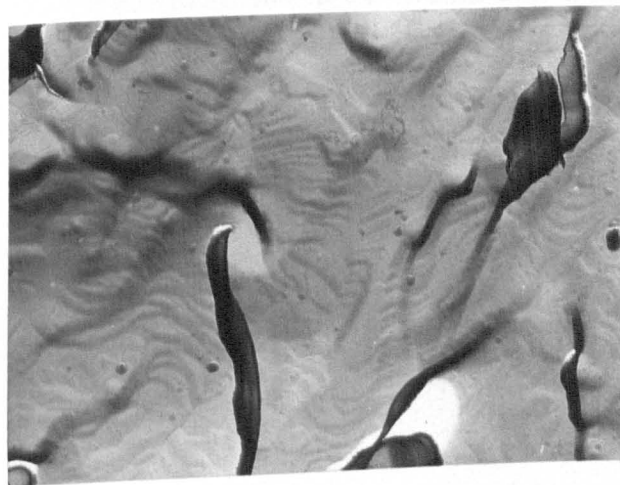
Thermal facets on the fracture surface of a chevron crack reheated on purpose (same crack as in Figure 123). Single stage carbon extraction replica examined in the transmission electron microscope. TP21.
